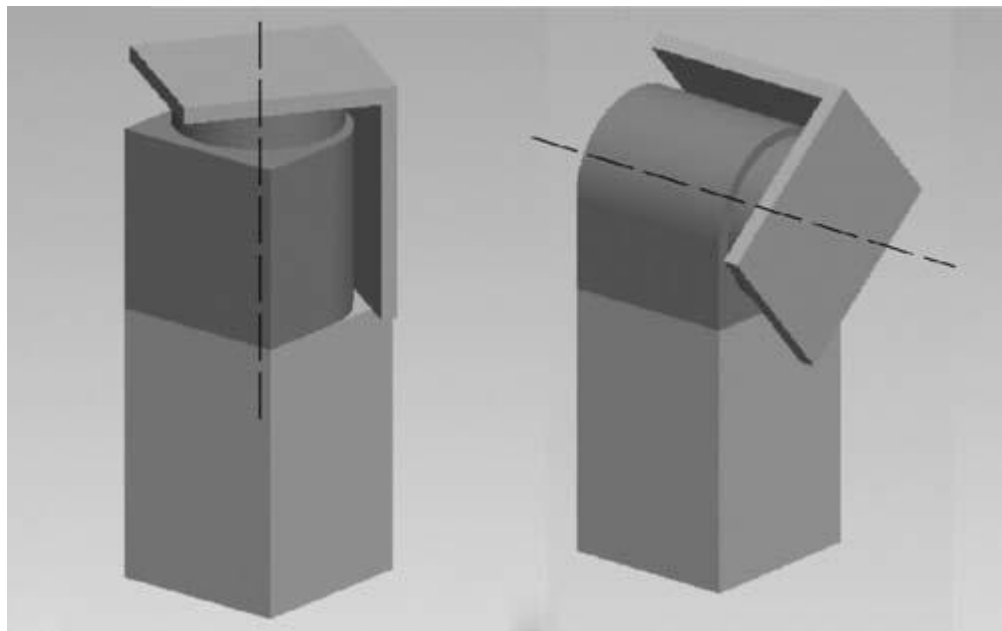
(a) Axial and (b) transversal assembly of a revolute joint module in a generic serial chain [28]
